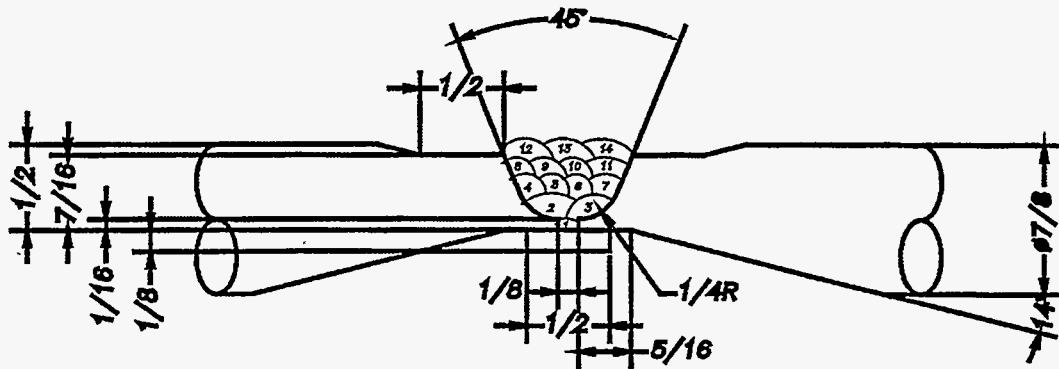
Joint design and schematic representation of bead placement for weld of 14.375-in. rings of centrifugally cast IC-221M.
